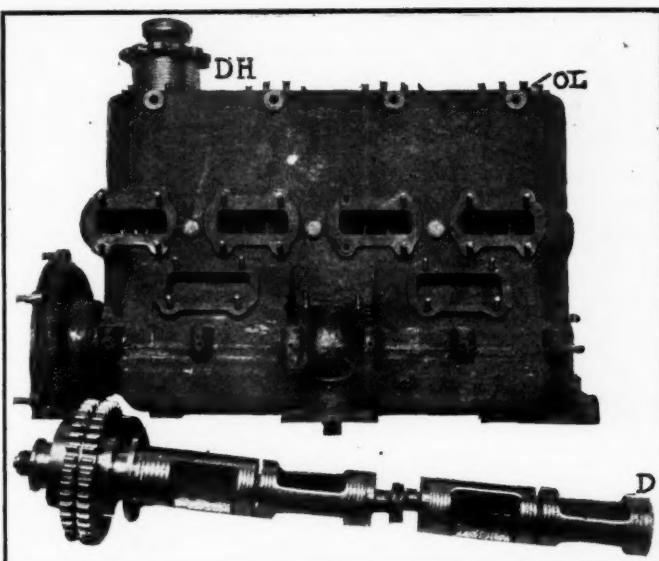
Four-cylinder block casting on Koecklin motor and the rotary sleeve
